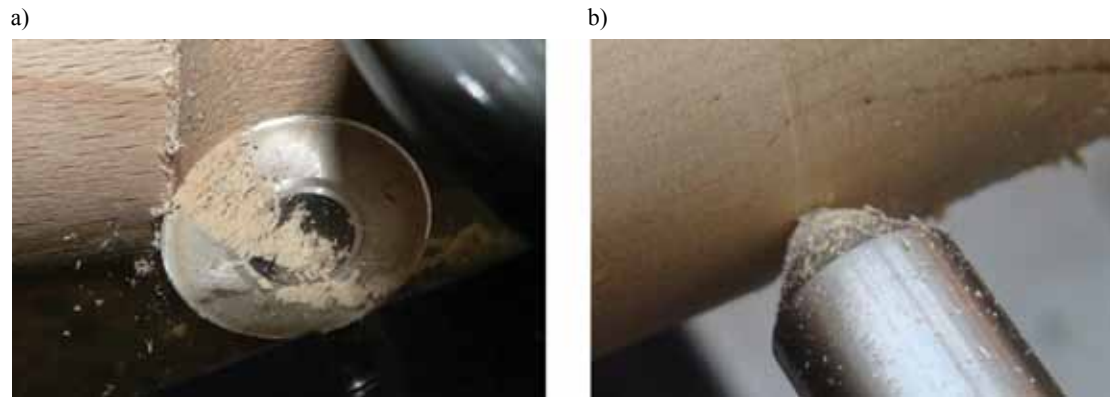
Turning process with rotating blade knife (a) and slide diamond burnishing (b)
